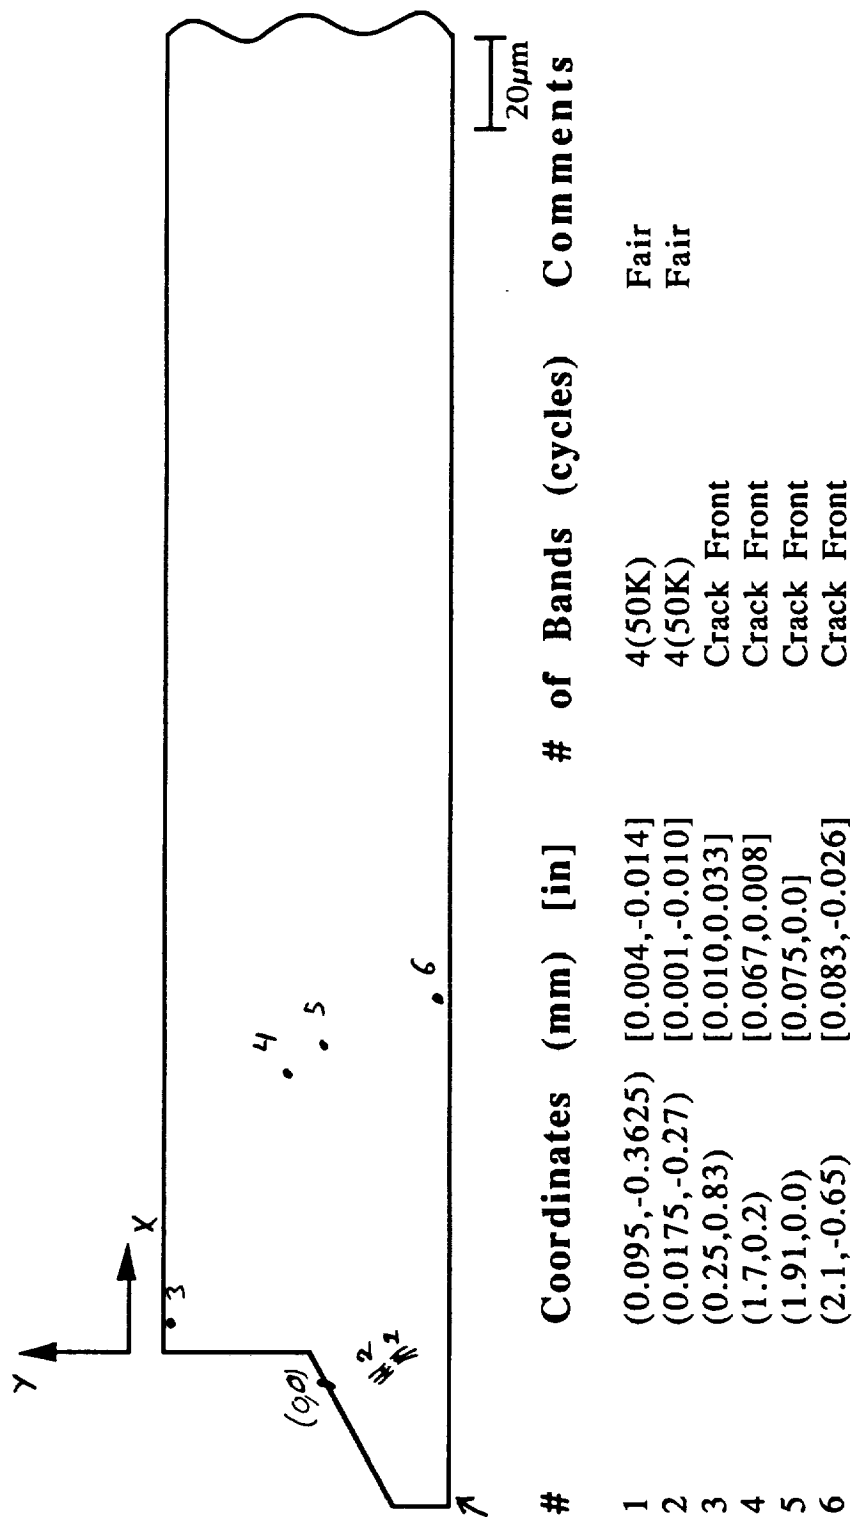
Rivet hole schematic: Upper rivet row, hole number 4J6, fatigue crack growth is in the aft direction.
